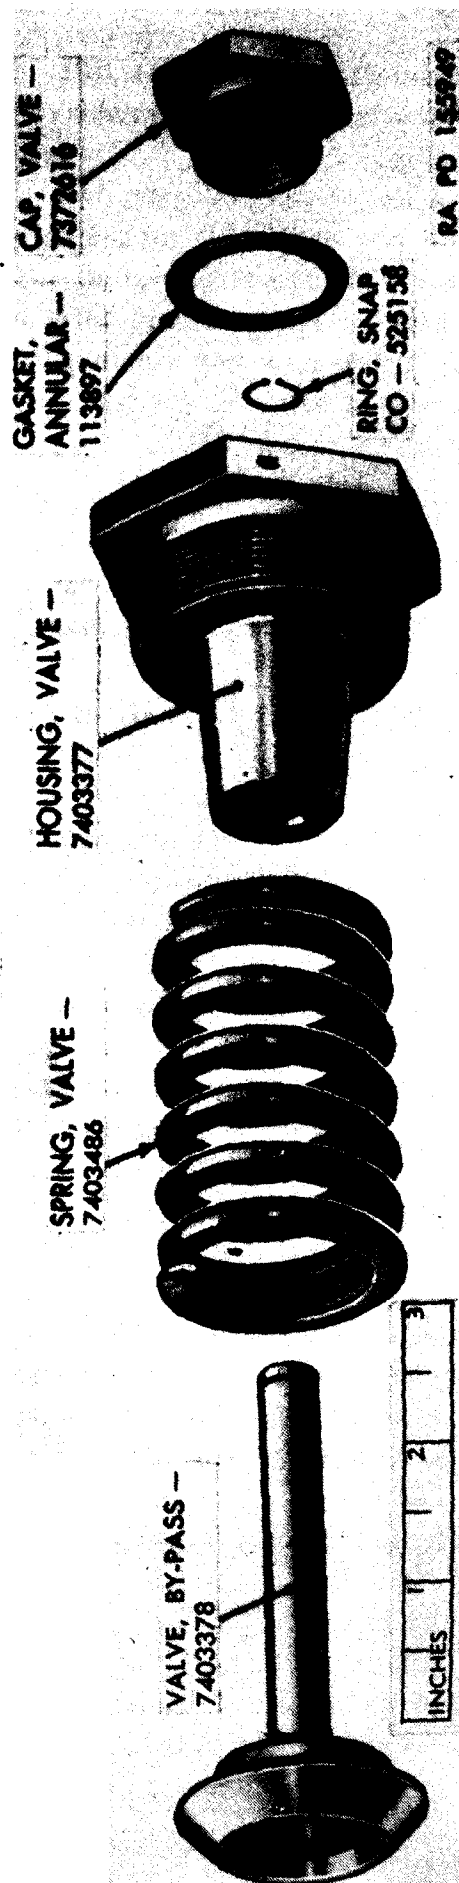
Oil cooler pressure by-pass valve—exploded view.
